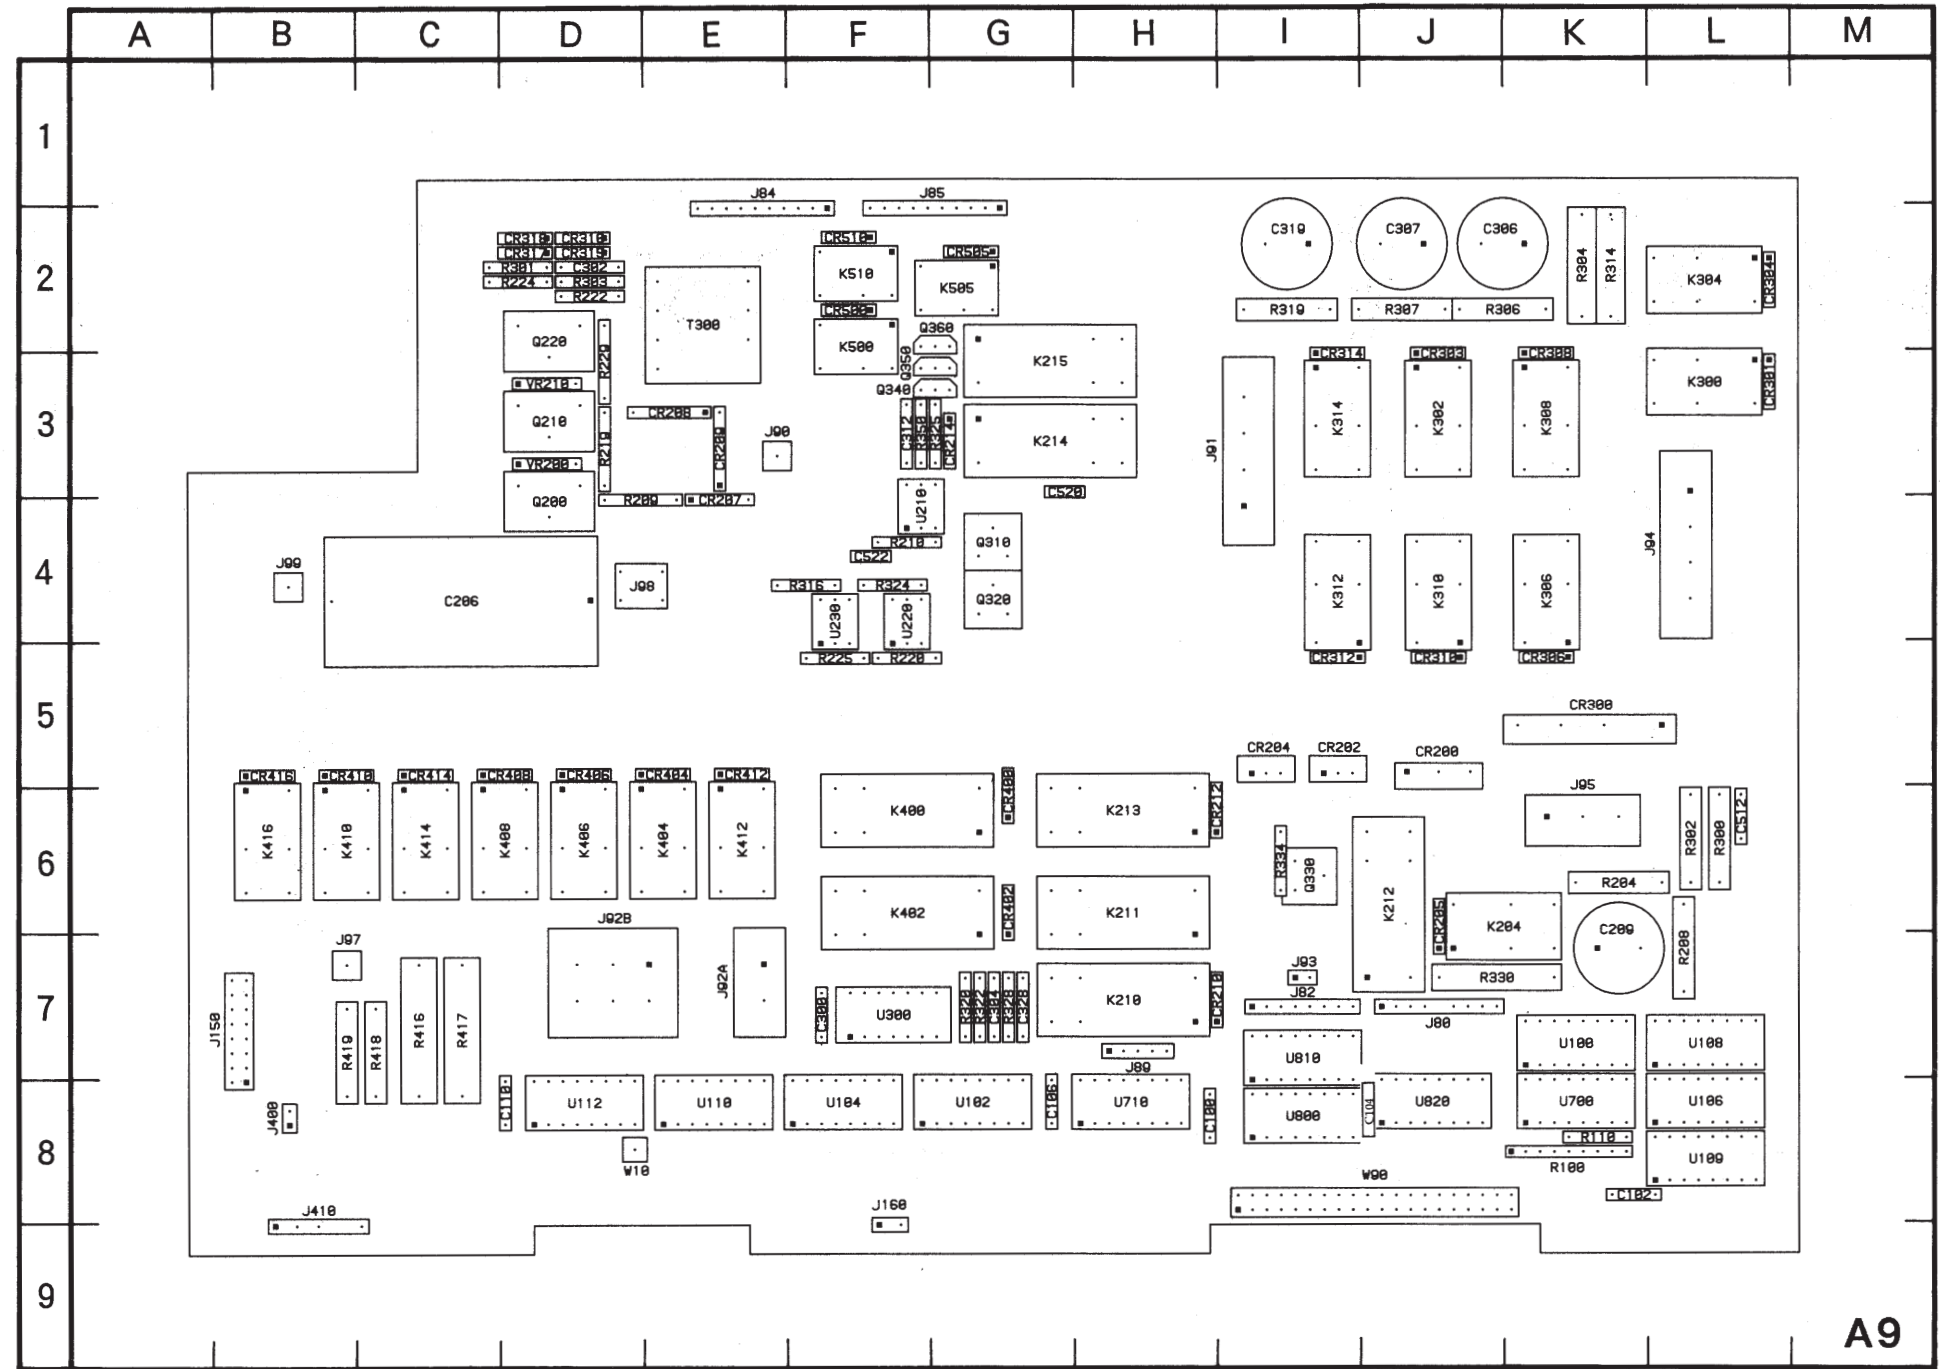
A9 — Low Voltage Relay circuit board assembly.
